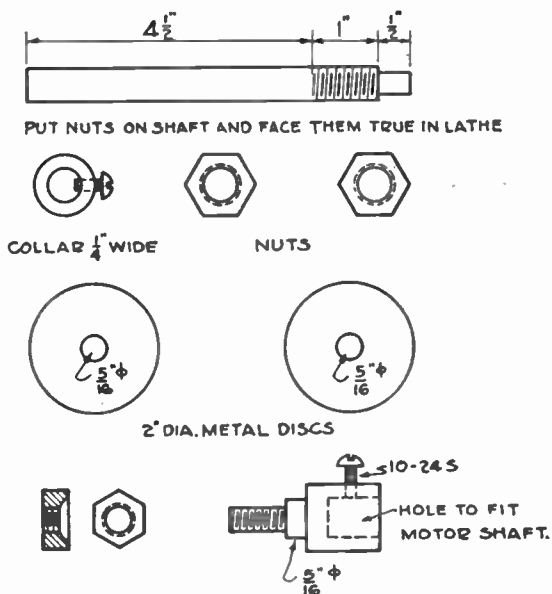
Metal Parts Necessary for Constructing Jenkins' Scanning Disc and Mounting.
